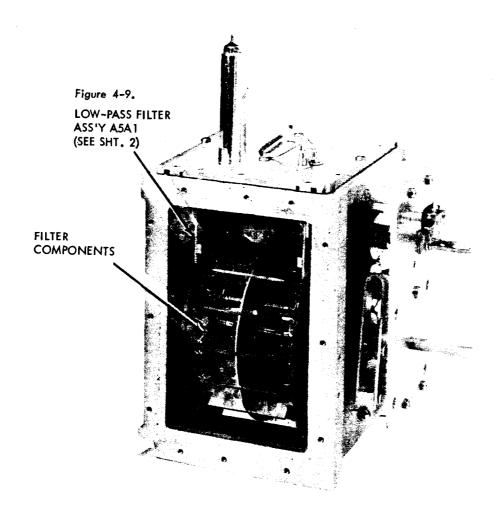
Low Pass Filter Assembly A5 (Sheet 1 of 2)
